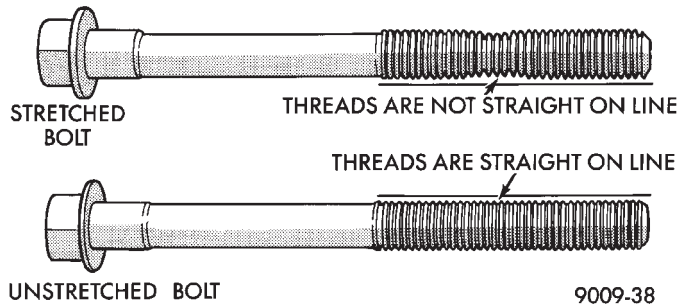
Checking Cylinder Head Bolts for Stretching (Necking)
